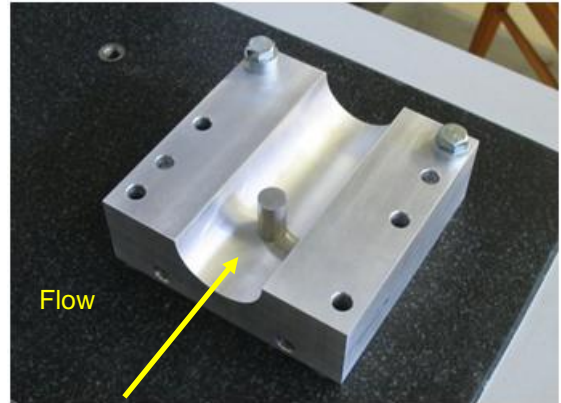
Pipe geometry with cylindrical obstacle, mounted on Coordinate Measurement Machine. Arrow indicates flow direction
